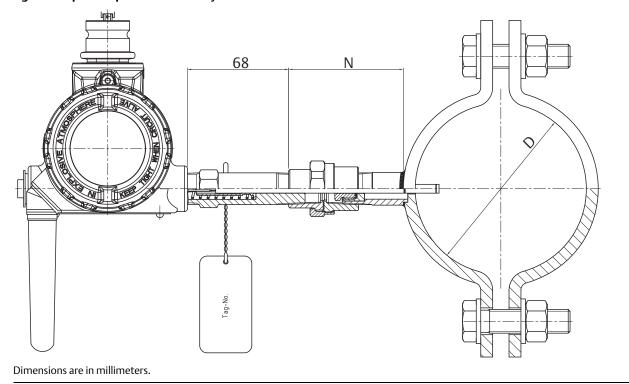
Pipe Clamp Sensor Assembly with Rosemount 648 Wireless Transmitter
